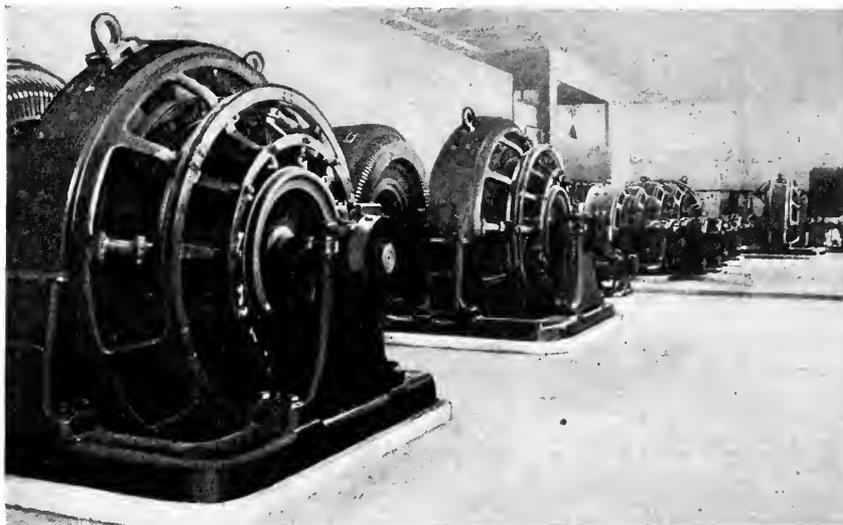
Motor Room of 14-in. Hot-strip Mill of Trumbull Steel Co.
